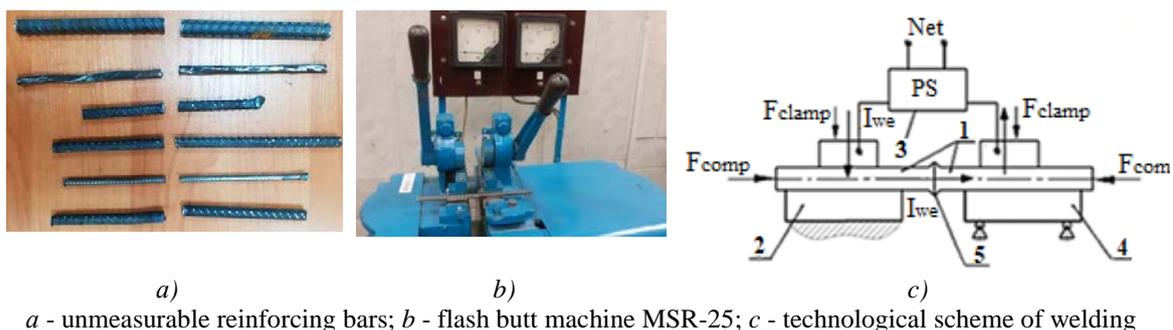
Unmeasurable reinforcing bars, flash butt machine MSR-25 and its technological scheme of welding
